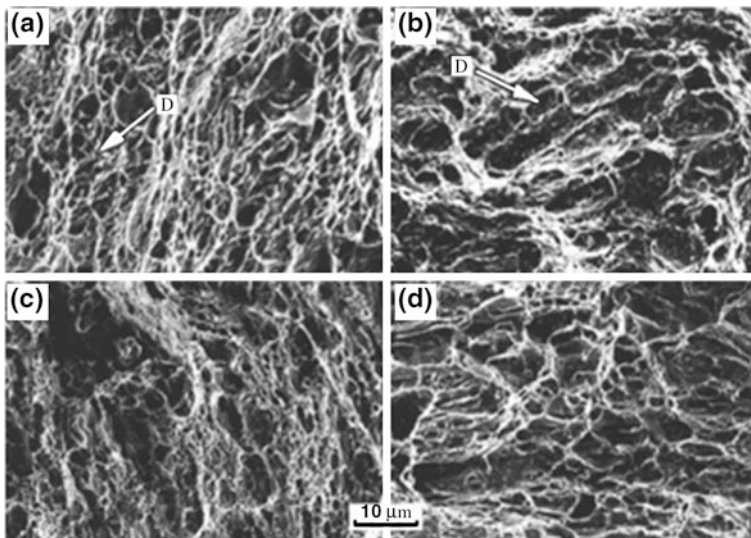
SEM fractographs of tensile and impact tested specimens (Lakshminarayanan and Balasubramaniam 2012). a Base metal tensile; b base metal impact; c LBW tensile; d LBW impact
